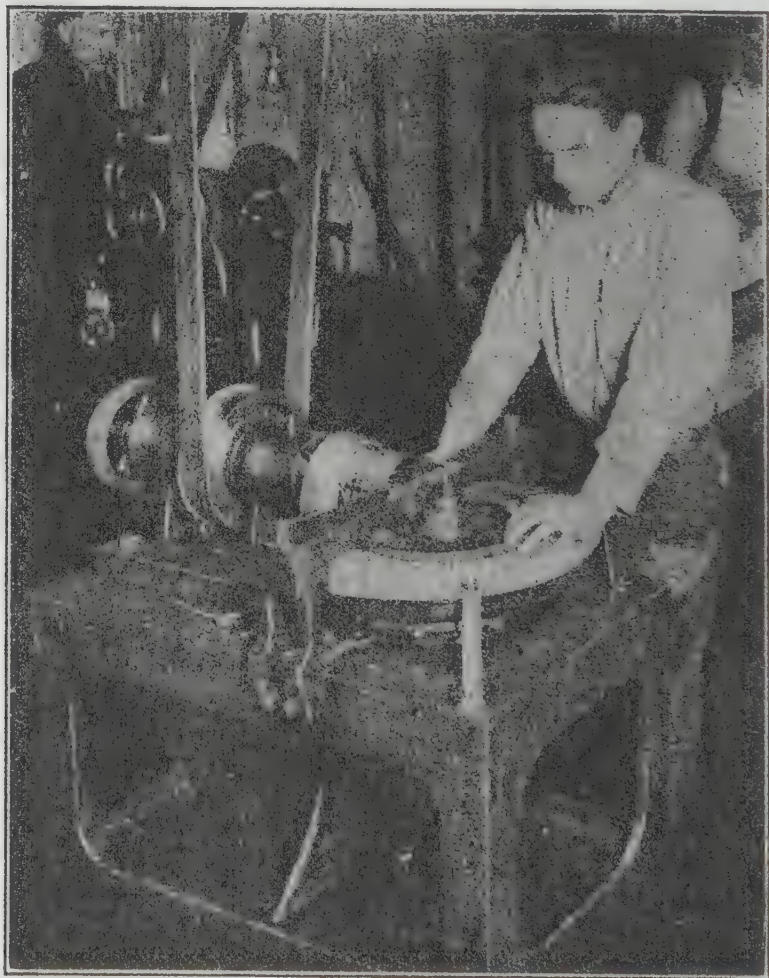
GRINDING-IN OF BEVEL GEARS.
